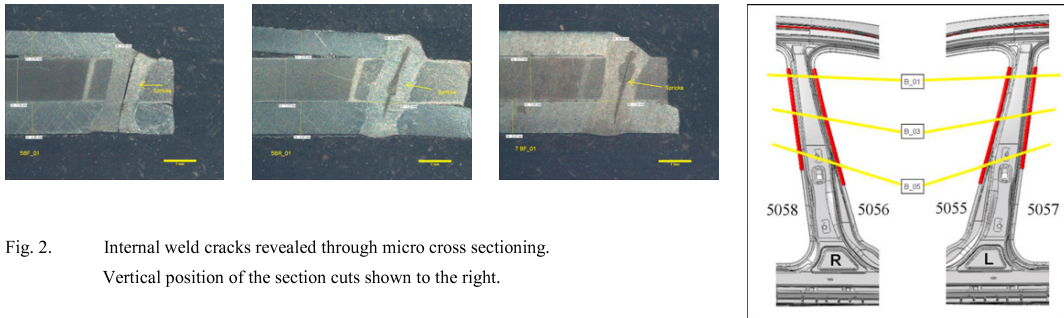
Internal weld cracks revealed through micro cross sectioning.
